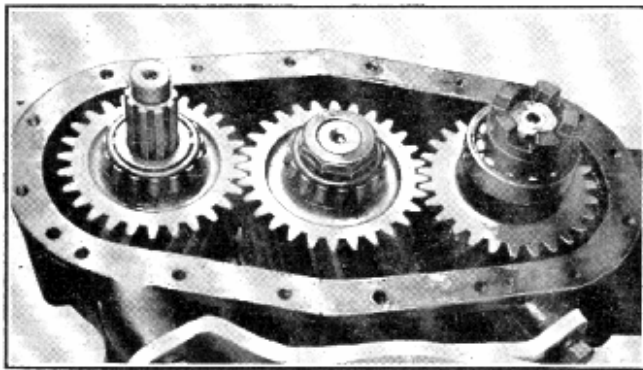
Transfer Case with Cover Removed Showing Gears and Shafts
